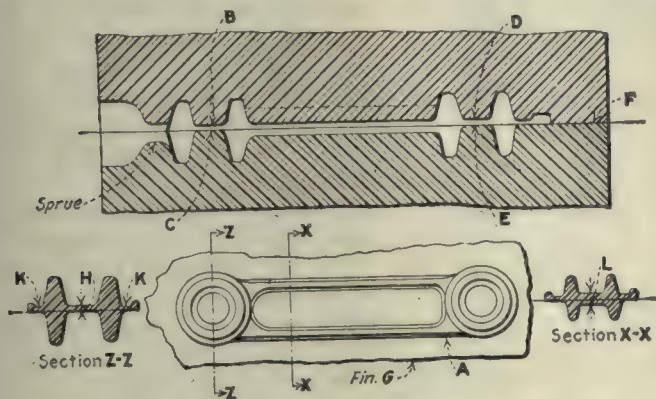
METHOD OF MAKING HOLE IN FORGING
